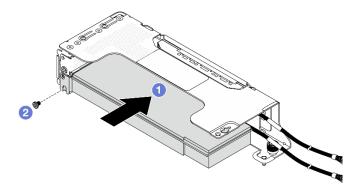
Installing a PCIe adapter on the 2LP riser cage
